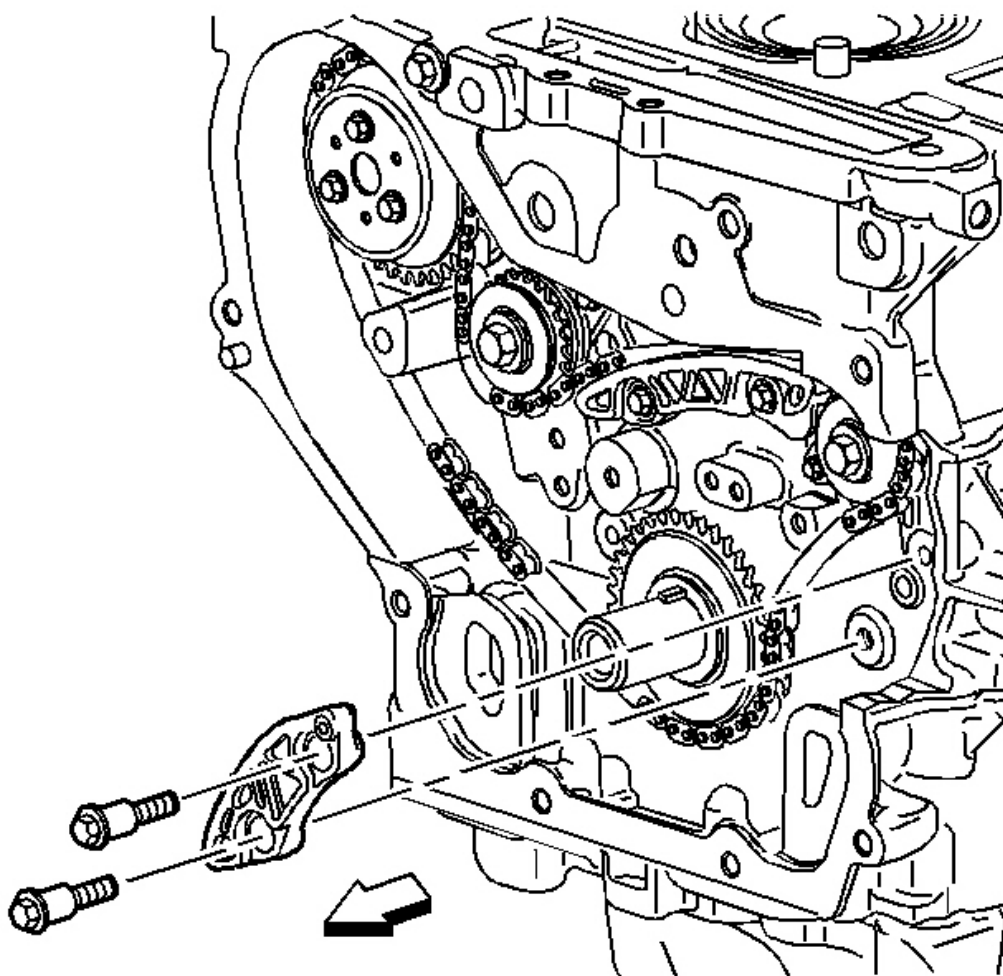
View Of Small Balance Shaft Drive Chain Guide
